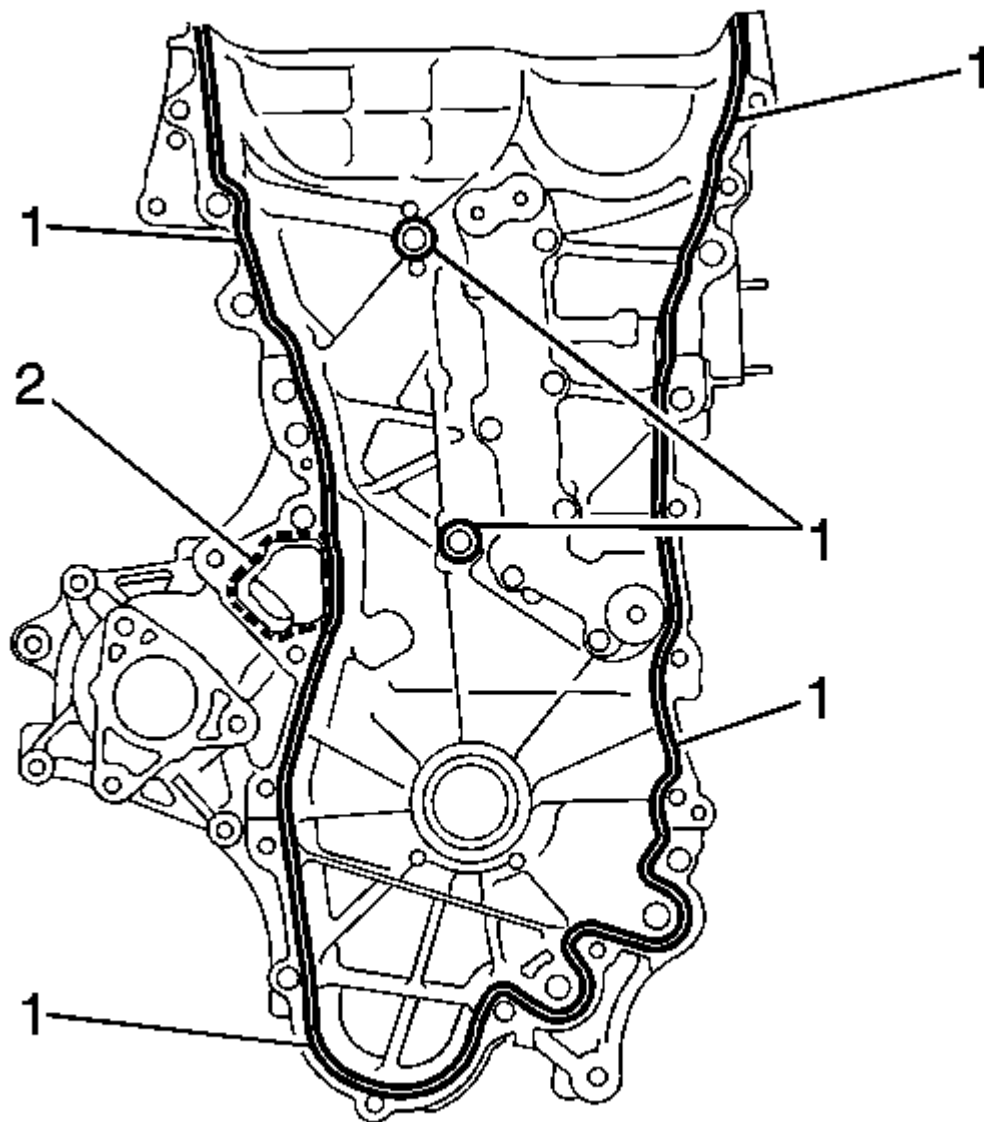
Identifying Sealant Area For Timing Chain Cover
